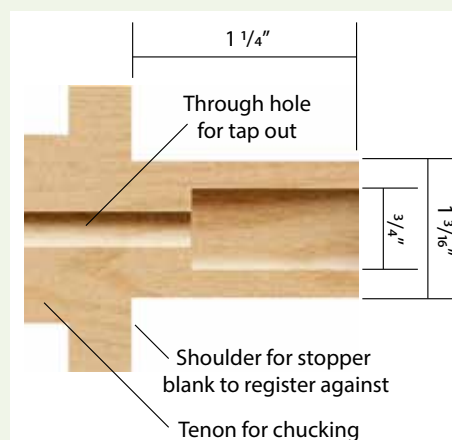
, photo 4. Turn a custom jam chuck. The larger-diameter hole accepts the cork when gently roughing up the T-top plastic for gluing, and the smaller through-hole allows for a tap-out bar to aid in cork and/or stopper blank removal if necessary.
